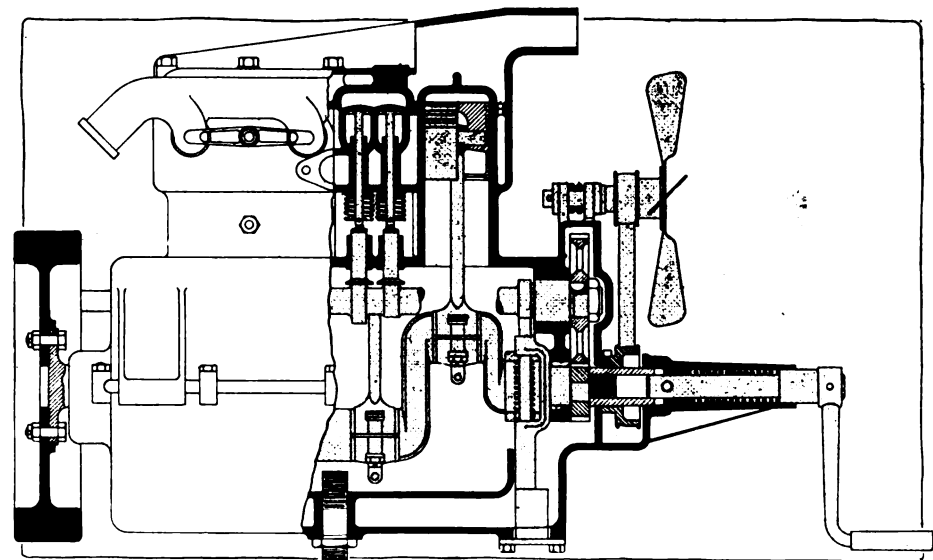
Four-cylinder Clark motor of 10-15 horsepower. It can be equipped with clutch and gearset in unit when desired
